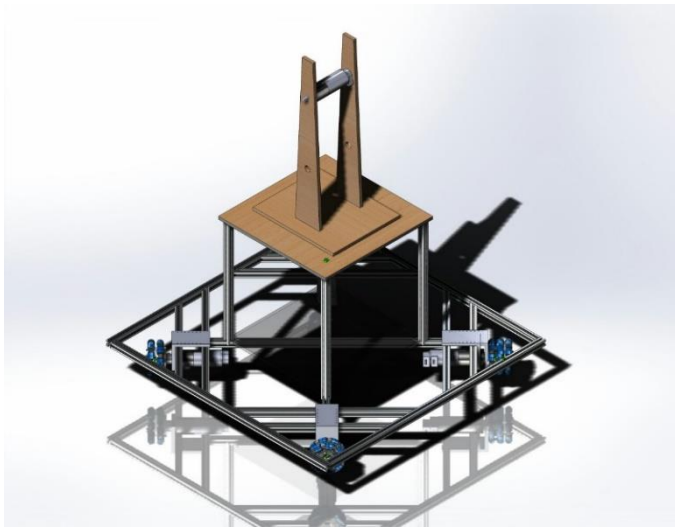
CAD DESIGN: ISOMETRIC VIEW OF MOTOR PROTOTYPE-1 OF AUTO BOT
